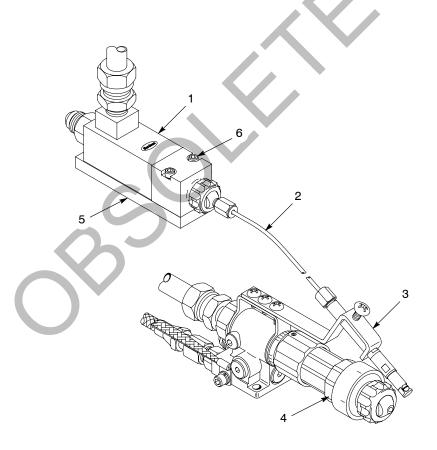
CleanSpray II Gun and Extension Assembly Mounting on MEG Gun
